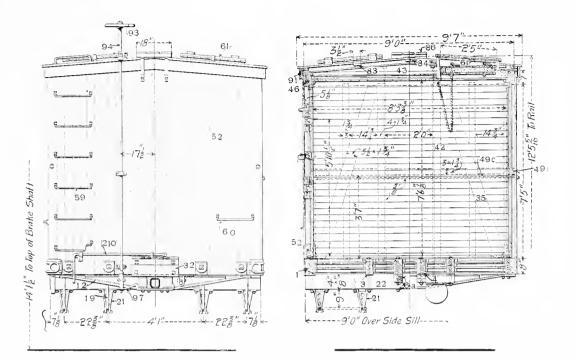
End Elevation and Cross-Section of 36-ft. Box Car, Structural Steel Underframe. Erie. Capacity, 80,000 lbs.
